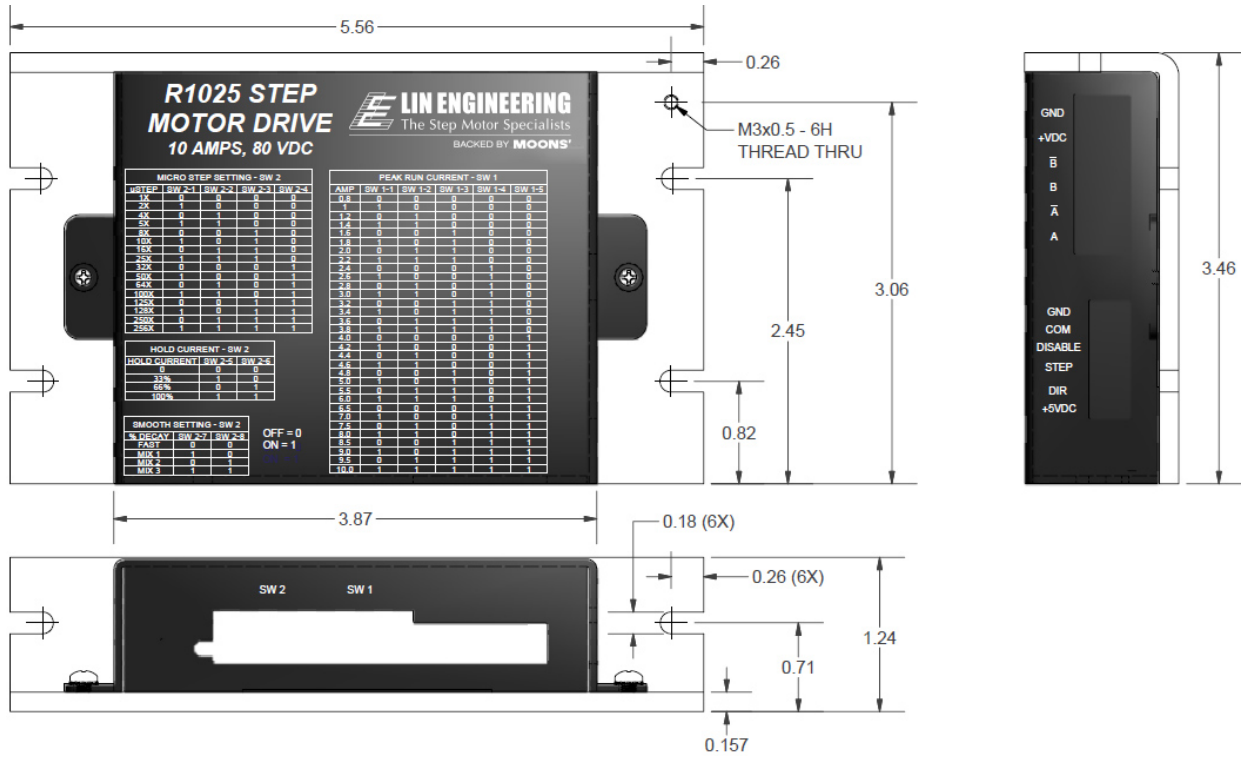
Mechanical Dimensions of the R1025 Driver
